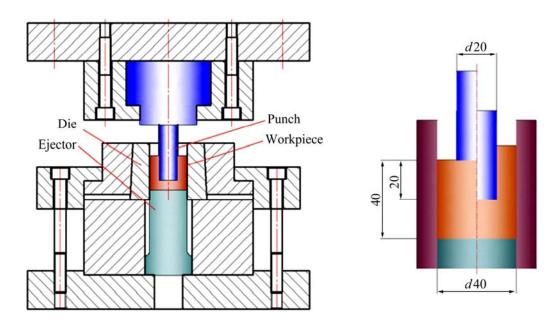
Schematic illustration of die assembly and related dimensions of forming system (unit: mm)
